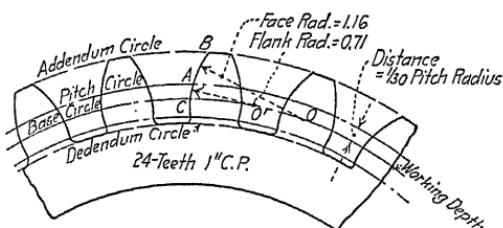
Drawing 14½-deg. involute teeth with the compass.
